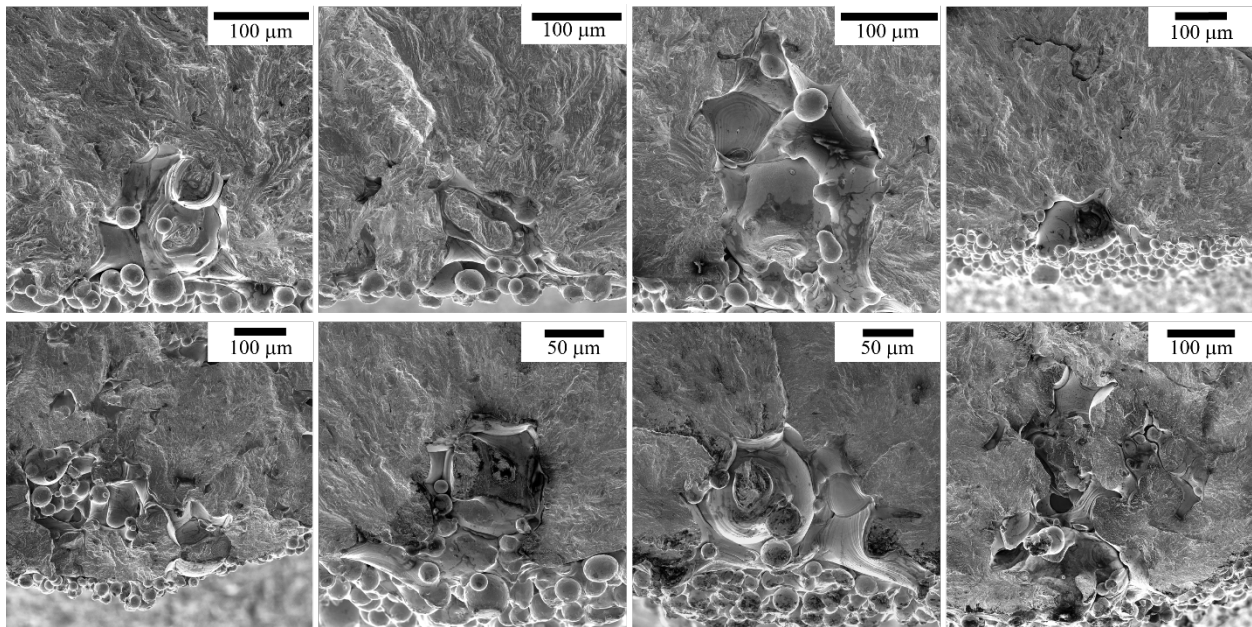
Selection of initiating defects seen on the fracture surface in both (top) 5.0 mm and (bottom) 1.5 mm ProX 200 specimens.
